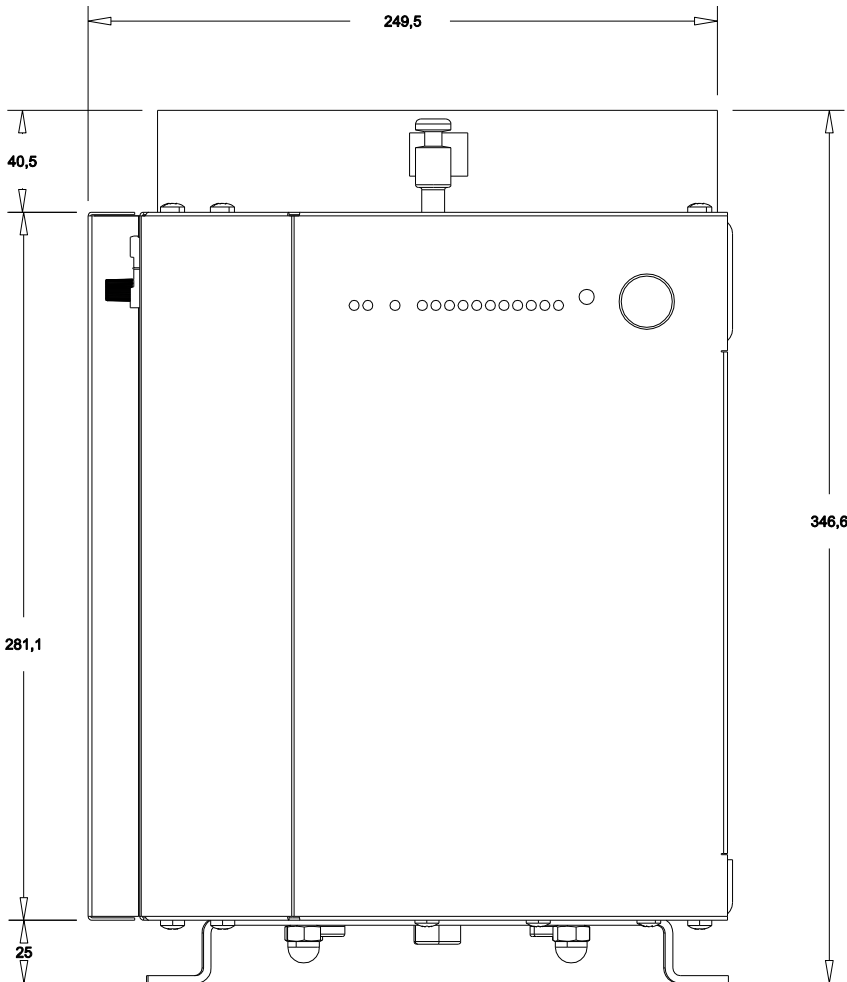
Device dimensions from front. All dimensions in millimeters.
